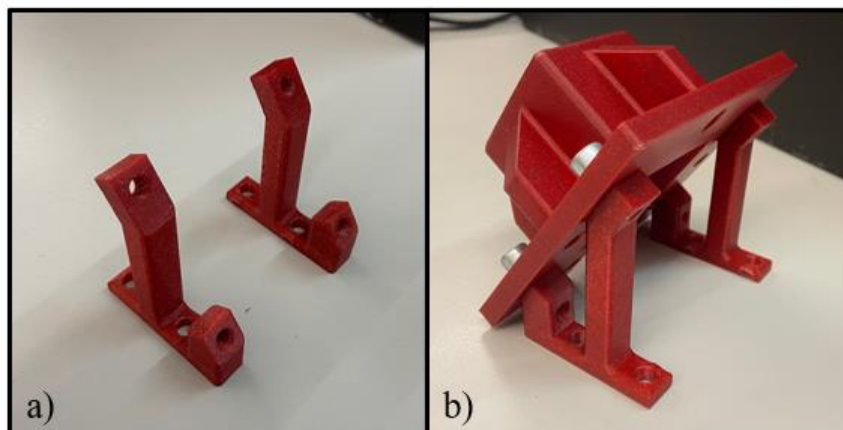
Motor incliners: (a) the printed component, (b) motor incliners angling the motor.
